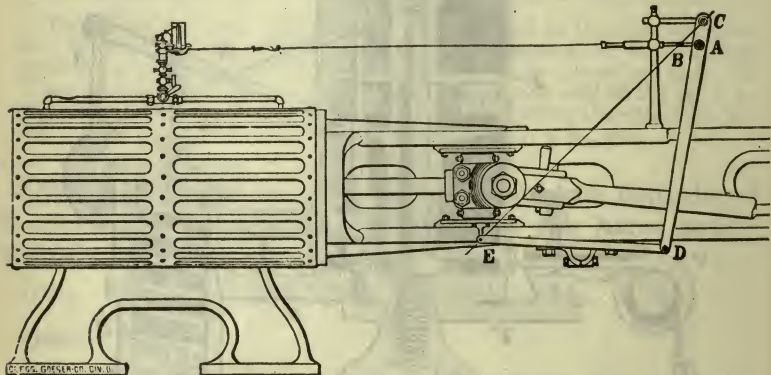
One form of reducing lever for an indicator attachment. A, is attachment of the cord; B, end of cord; C, pivot of reducing lever; D, swinging joint of reducing lever; E, point of attachment to cross-head for the link joining reducing lever at D. The indicator is shown at top of cylinder, connected by a three-way cock to pipes from both ends of cylinder.
